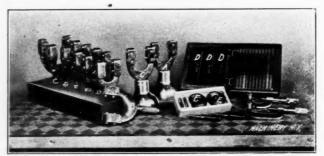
Limit Gages and Gages for Testing Lead, used in the Shops for Working and Inspection Gages.
